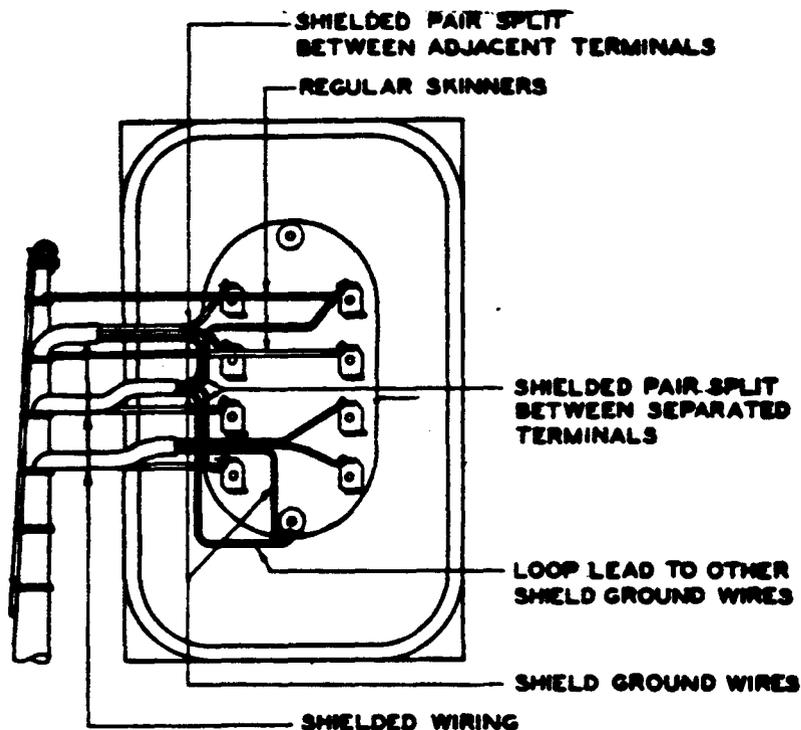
METHOD OF FORMING SHIELDED WIRE
